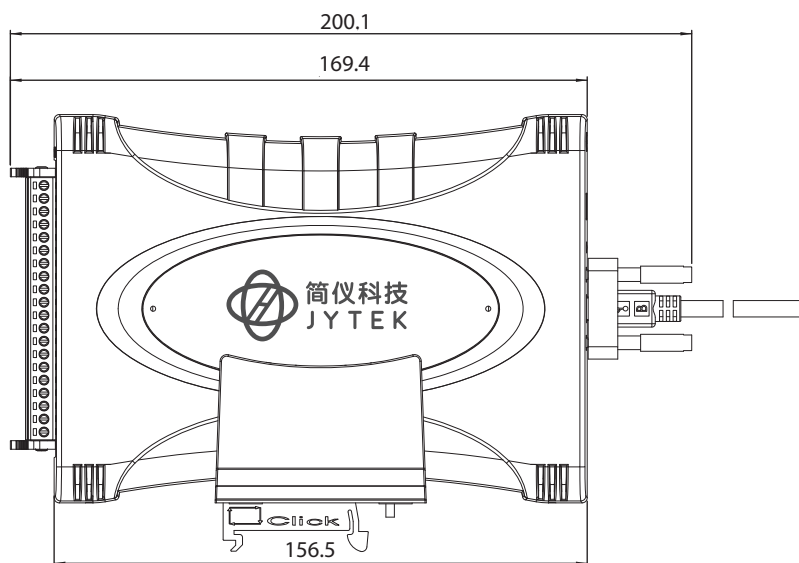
Module, Stand, & Wall Mount Kit Side View (w/ connections)
